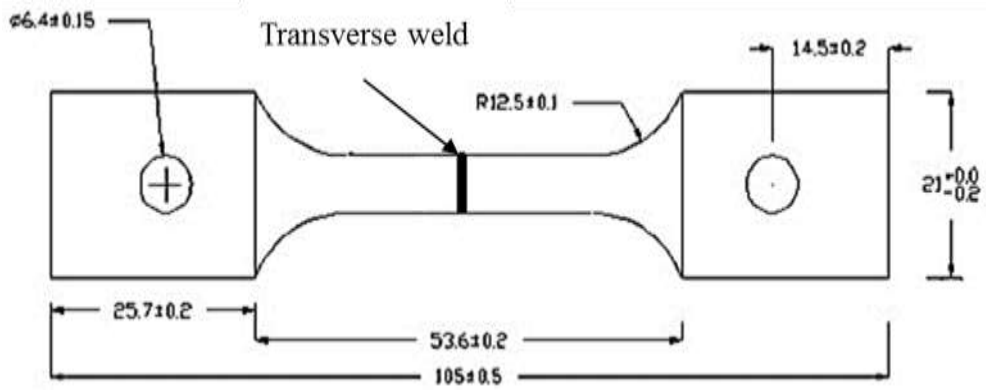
ASTM standard specimen to test weld strength
